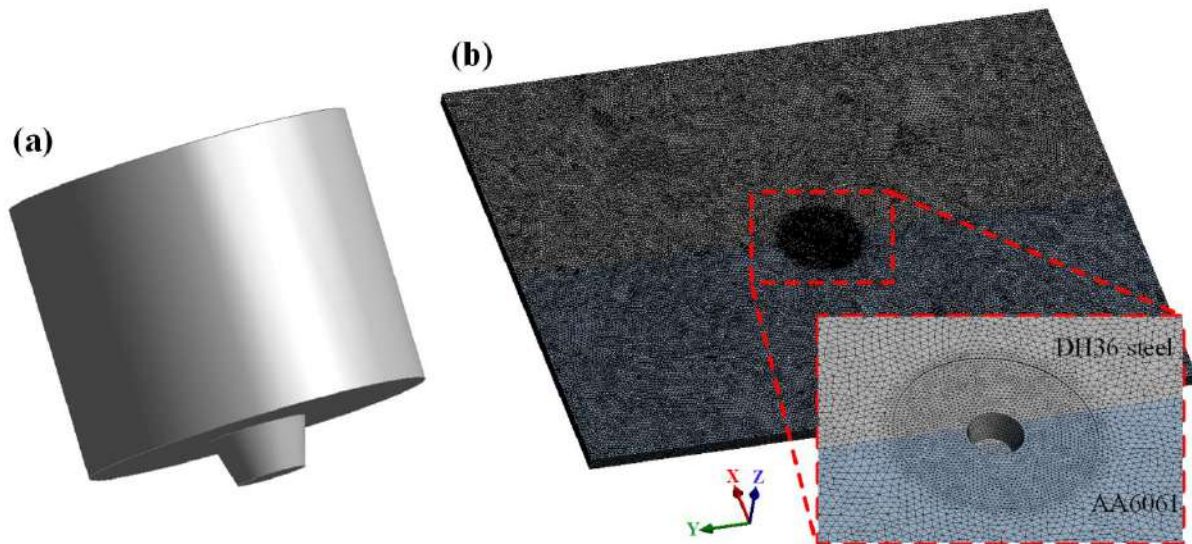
(a) FSW tool; and (b) meshing of the workpiece
